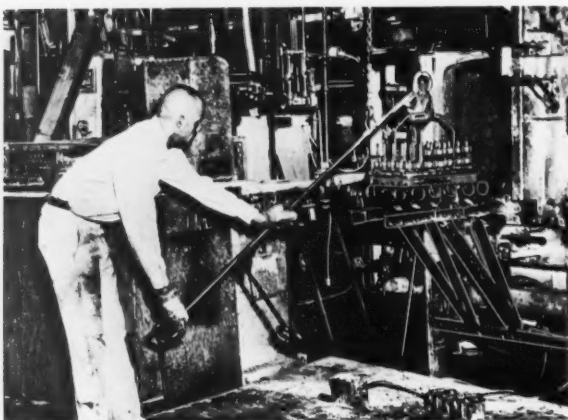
Charging Surface Combustion rotary hearth furnace with pinions and gears. Quench tank next to operator.
